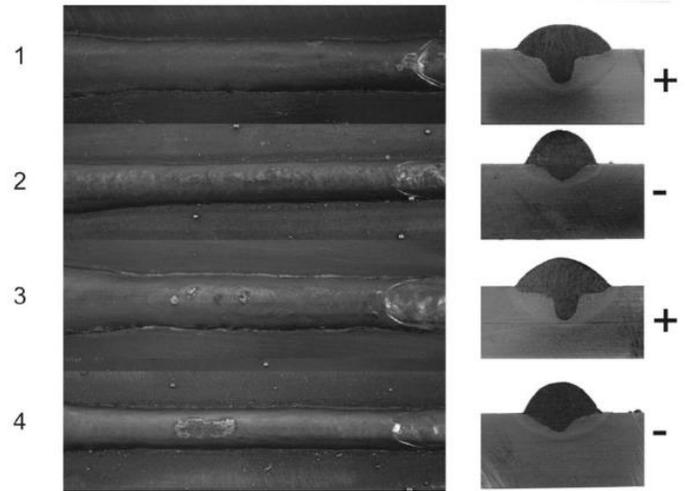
Effects of negative polarity MIG/MAG welding over weld seam geometrical profile (Schwedersky, 2007).
